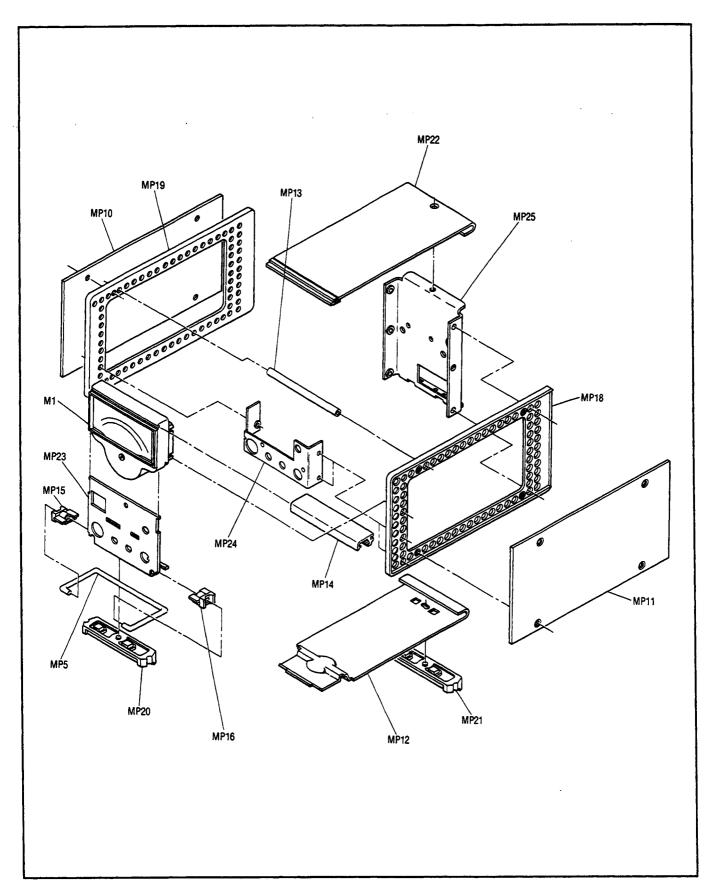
Cabinet Parts Illustrated Parts Breakdown
